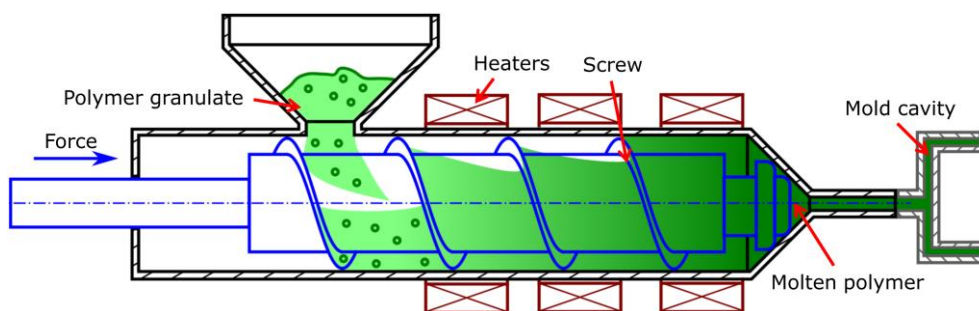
Illustration of typical injection molding machine. Adapted from<sup>[16]</sup>.
